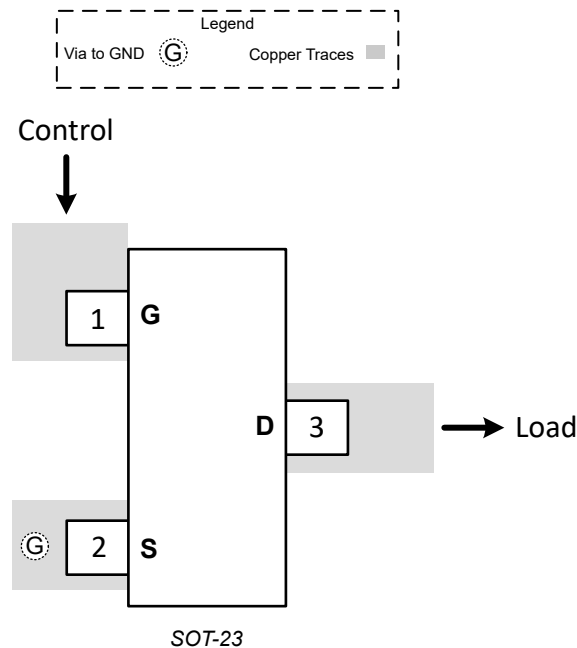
Example Layout for the SOT-23 or SOT-SC70 Package
